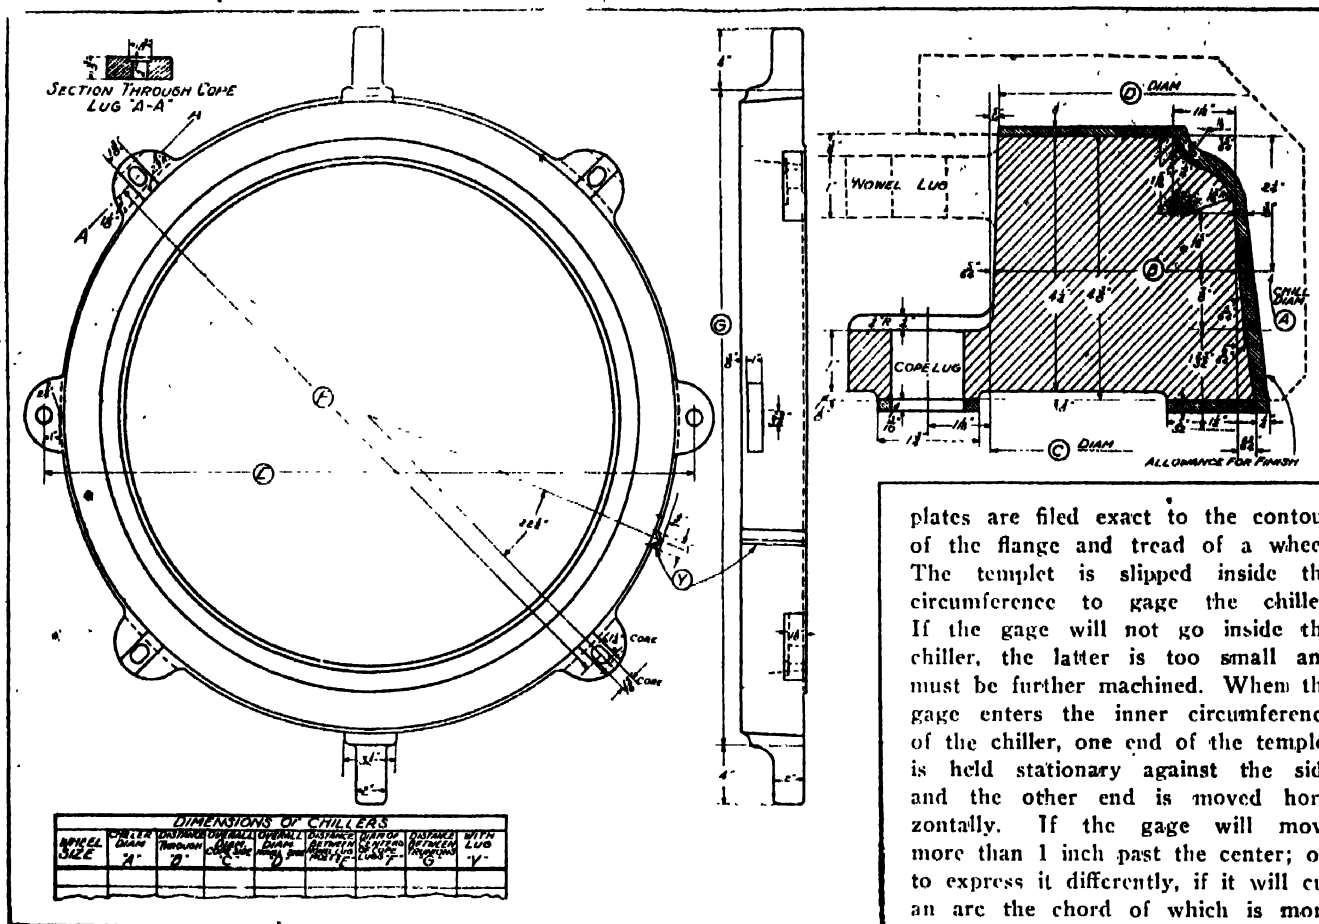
THE COMMON CHILLER IS CAST IN ONE PIECE WITH LUGS AND TRUNNIONS—DIMENSIONS ARE GIVEN FOR THE 33-INCH WHEEL.
